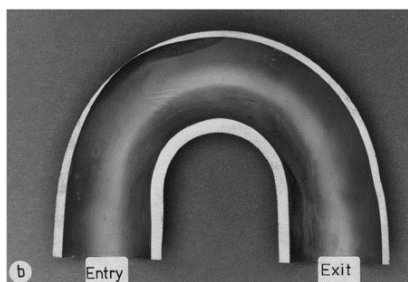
Damage pattern in a copper pipe worn by erosion corrosion. The elbow previously had a uniform diameter [8].
